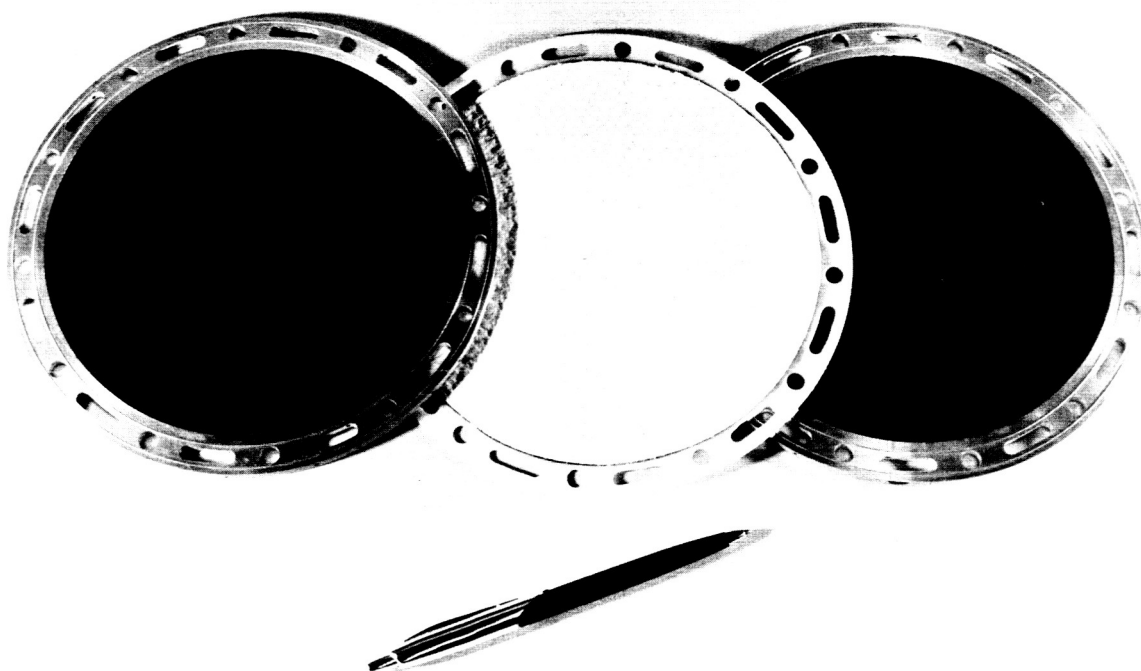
ELECTRODE AND SEPARATOR OF ASSEMBLY
